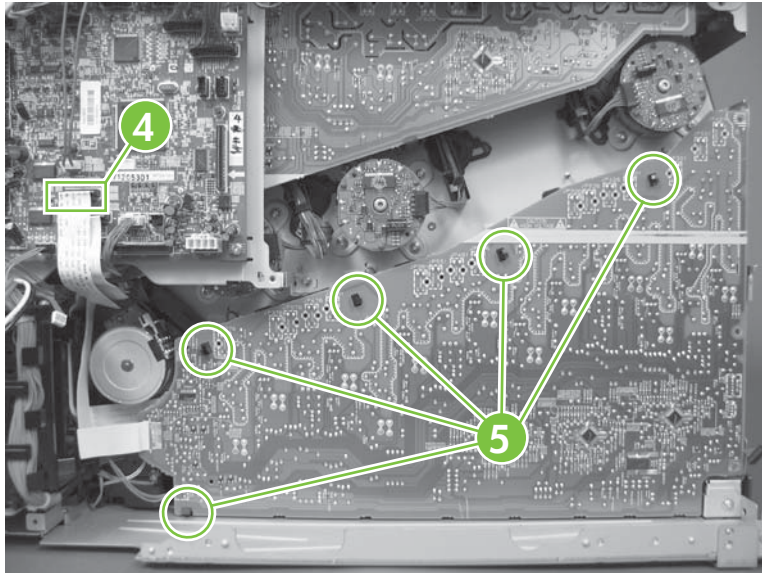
Remove the high-voltage power supply lower (2 of 4)
